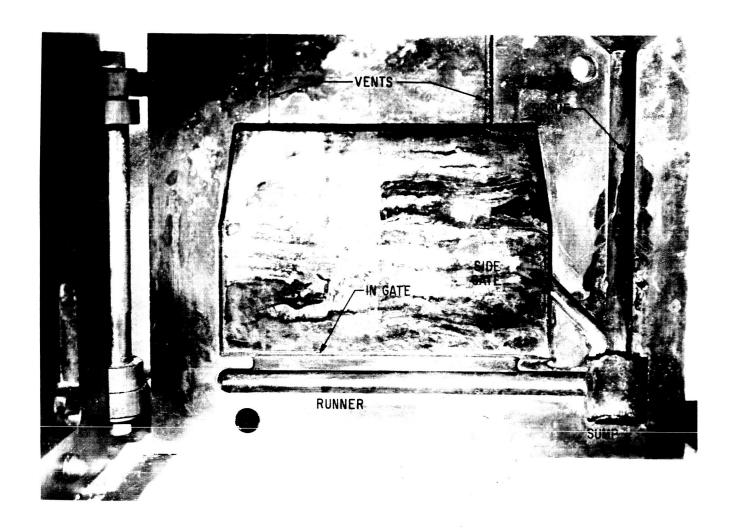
Opened View of Cast Iron Permanent Mold Showing An Enlarged Runner And The Final Ingate Design. The Side Gate Was Blocked Off For Most Of The Melts.
